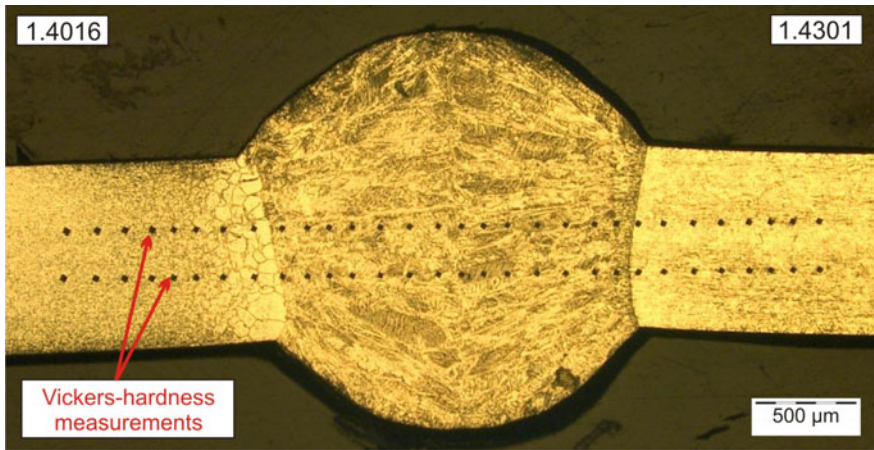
Lateral metallographic cross-section of a austenitic-ferritic weld of 1.4016 and 1.4301, welded with continuous-wave solid-state laser and filler wire 1.4576 (laser power 2.800 W, process feed rate 5 m/min, wire diameter 0,8 mm, wire feed rate 5 m/min).
